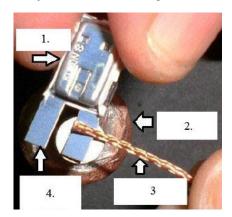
Welding the connection of the thermal protection with the collector brush wire: 1 - thermal protection; 2 - lower electrode; 3 - collector brush wire; 4 - thermal protection connection
